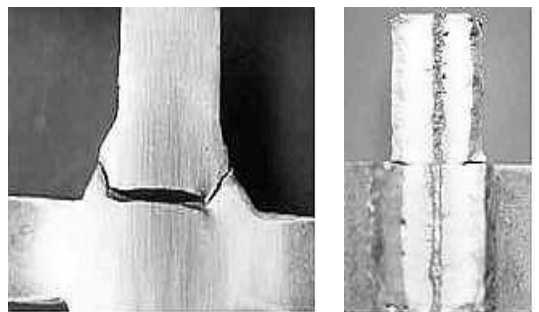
Root failure mode in cruciform fillet weld joint.
